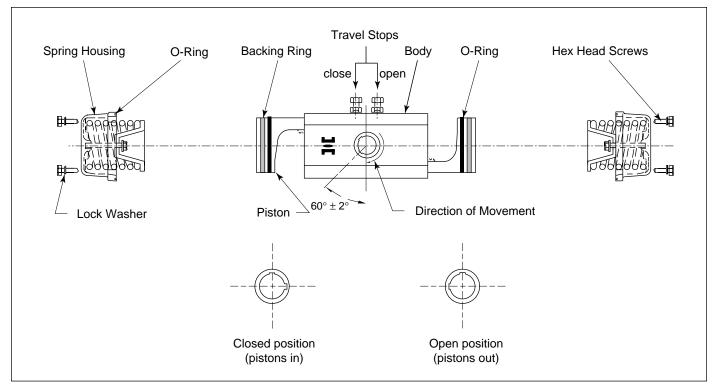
Top View of Standard (Fail Close) Single Acting Actuator Assembly - Model 065-091
